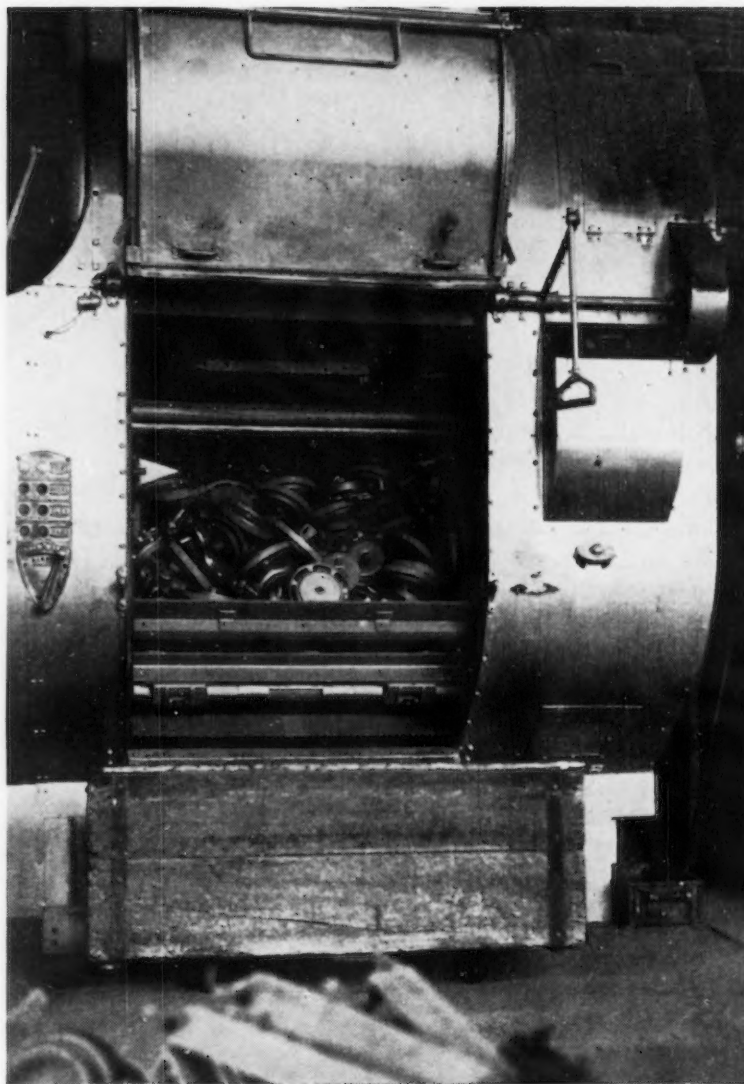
Roto-Blast equipment, particularly adapted to the cleaning of small or fragile castings.
